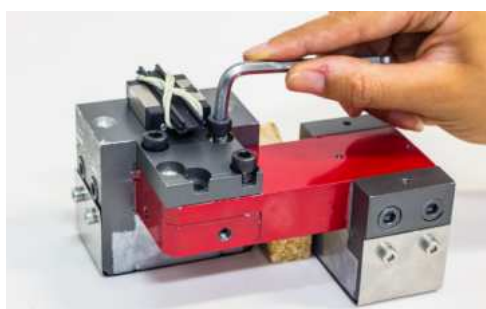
Assembly of the guideway slider blocks to the L-shaped set.
